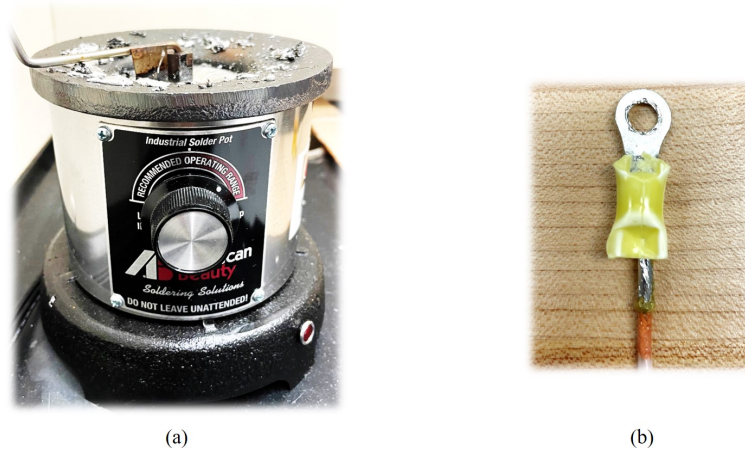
Litz wire termination: (a) a solder pot is used for soldering each end of litz wires (b) a soldered wire is terminated by a crimp ring connector.
